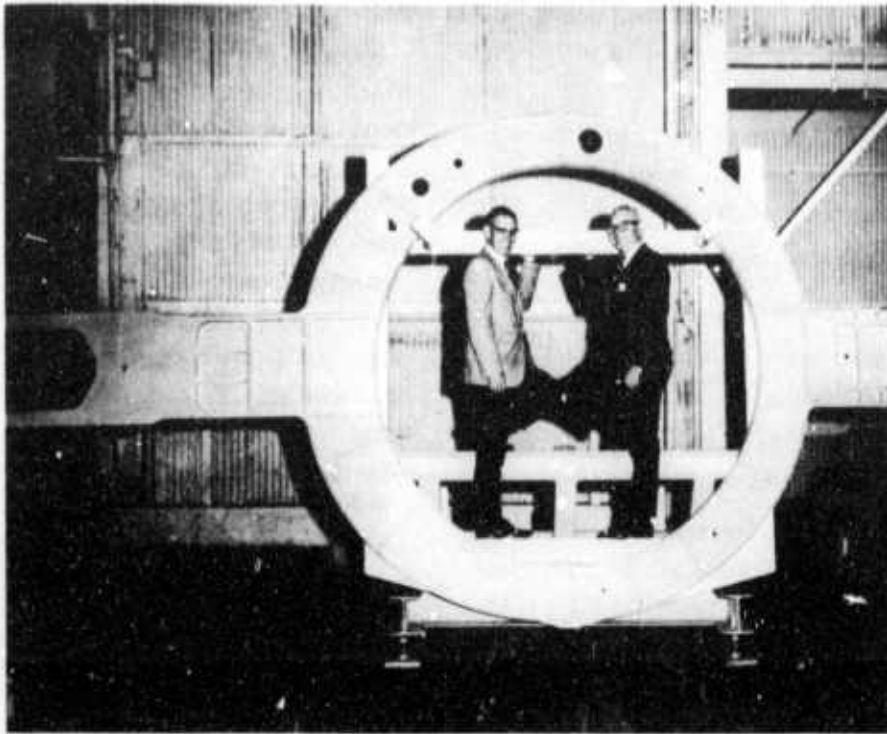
Machined "Banjo Fitting" for DC-10 aircraft.
